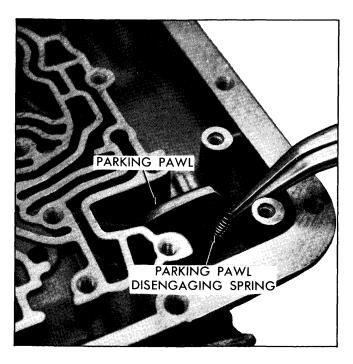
Removing Parking Pawl Disengaging Spring
